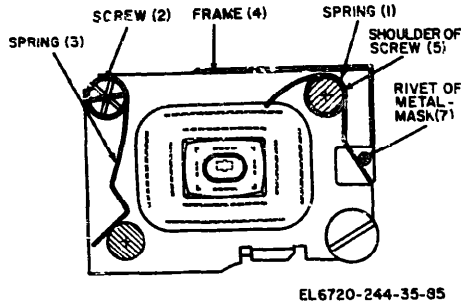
Spring location (springs (1) and (3) from fig. 3-7).
